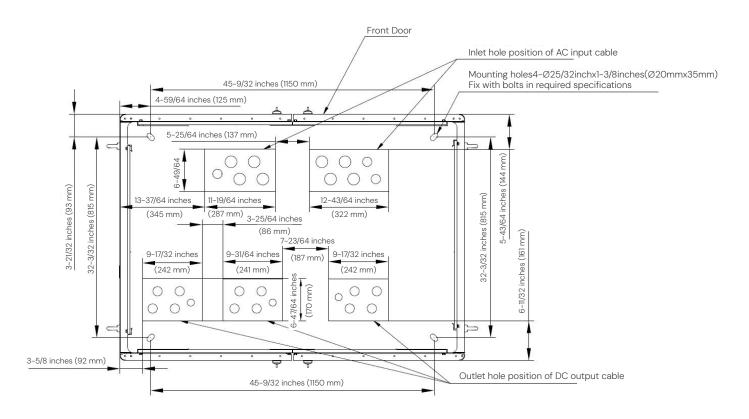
B hole positions and dimensions at the bottom of Power Bank
